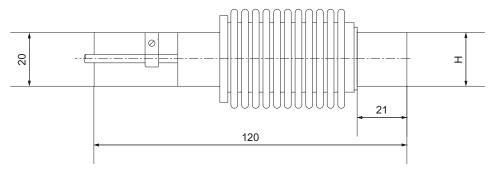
SIWAREX WL230 BB-S SA dimension drawing
